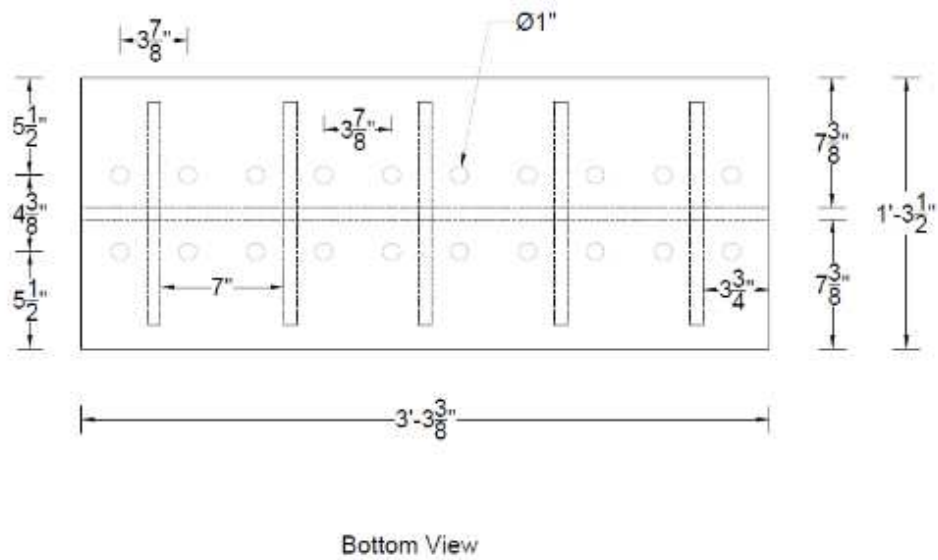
Spreader beam bottom view with holes to connect angles connecting specimen
